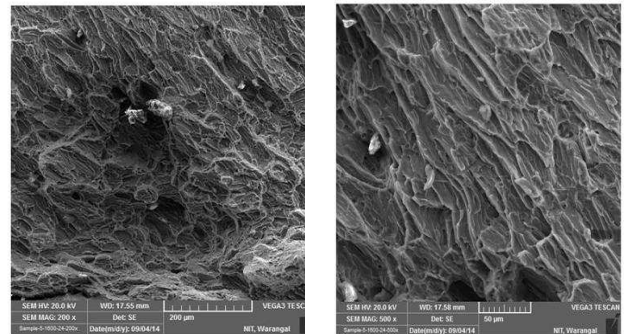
(b) & (c) SEM fractographs of tensile tested FSW joint (1600rpm/24 mm/min)
